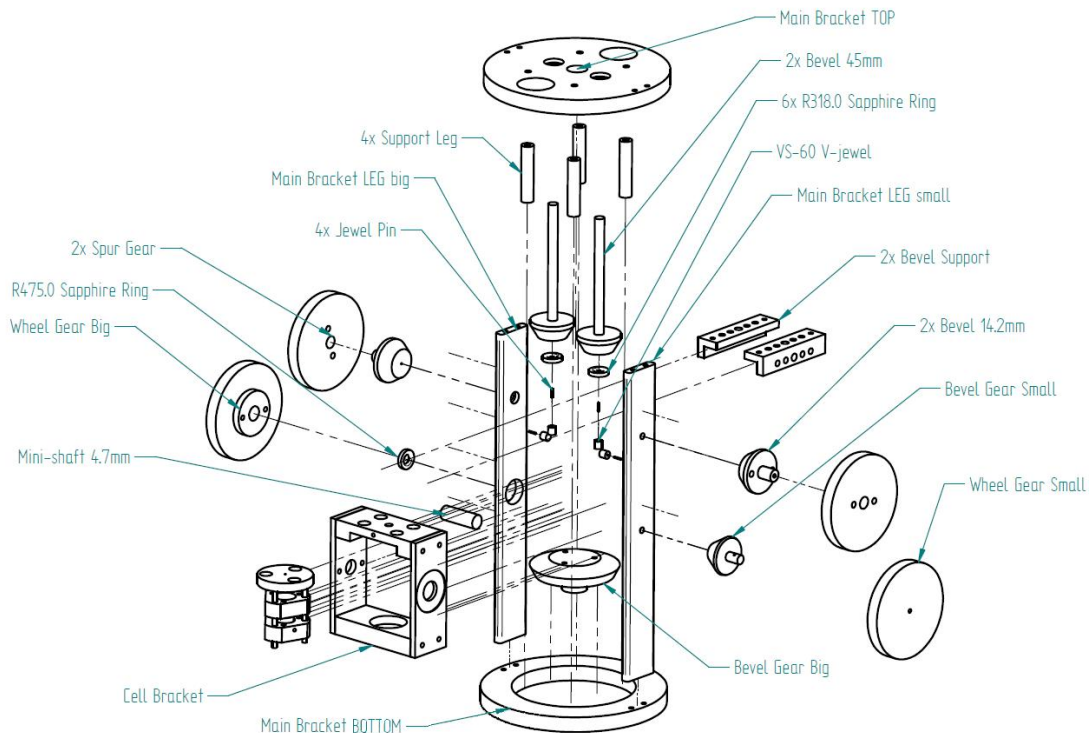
Exploded assembly of the 2-axis rotator. Description in the text.
